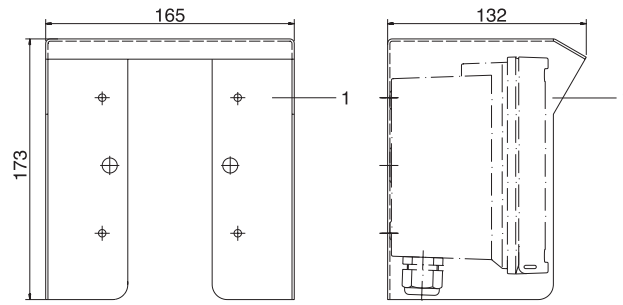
ZU 0276 protective hood for wall and pipe mounting
